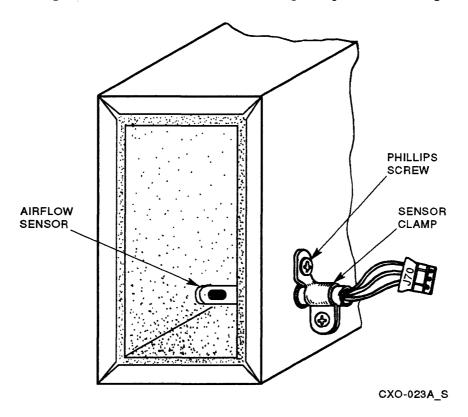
Removing and Replacing the HSC50 Airflow Sensor Assembly
